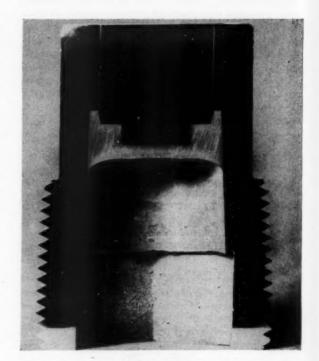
Cross-section of boiler drop plug. Rolled bronze button is held in place in casting by means of a 0.003-in. film of metal that softens at 540 F.
